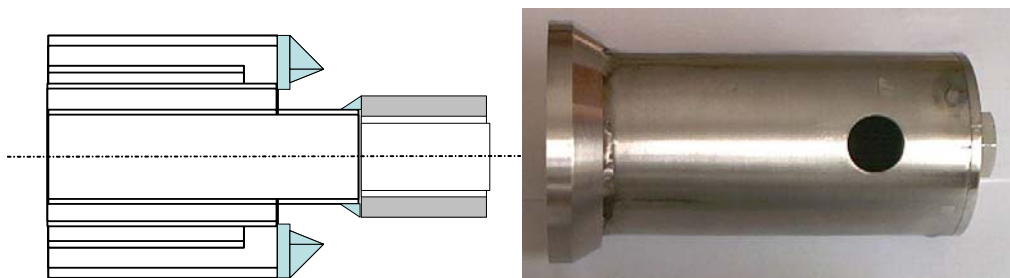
Sketch of the probe and the probe head with the hole for the CCD camera.
